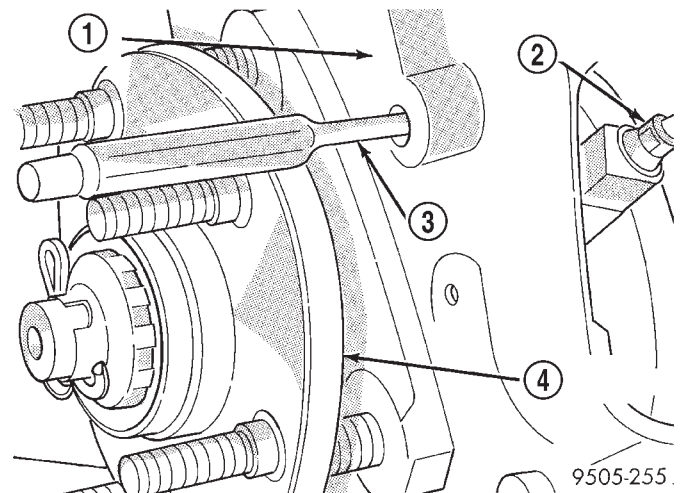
Speed Sensor Head Removal From Steering Knuckle
